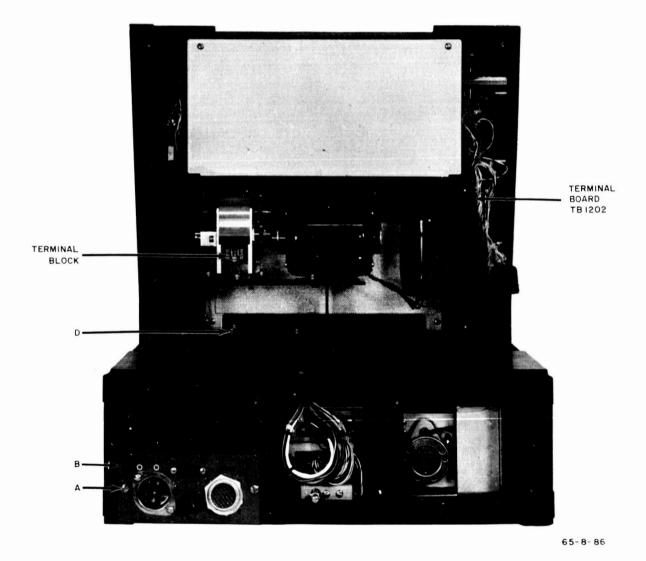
Motor and Gear Train Assembly, and Connector 1A6J1
